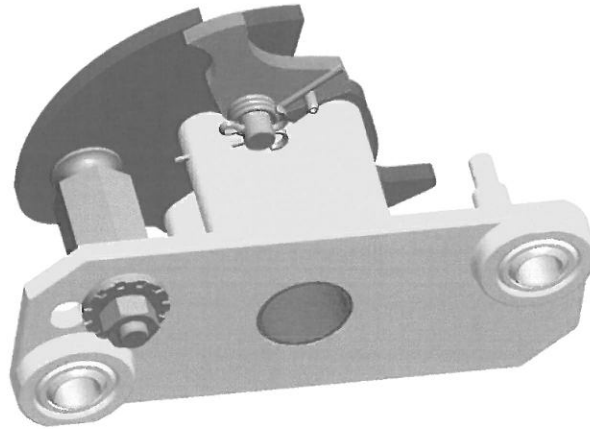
P/N 50530211-04 Mechanically Fastened Teeter Lever Assembly with Resilient Lock
